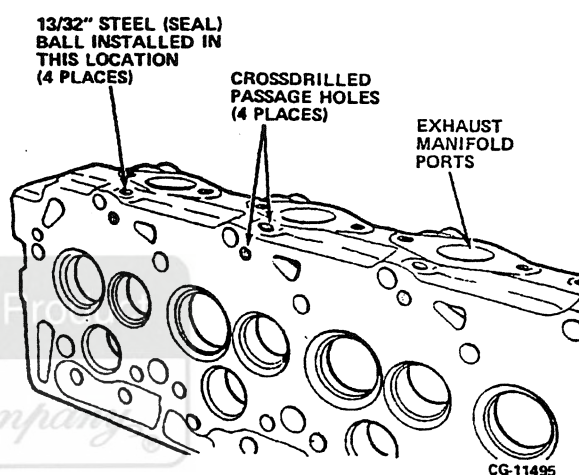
A. Crossdrilled Passages in Cylinder Head (Bottom View)
